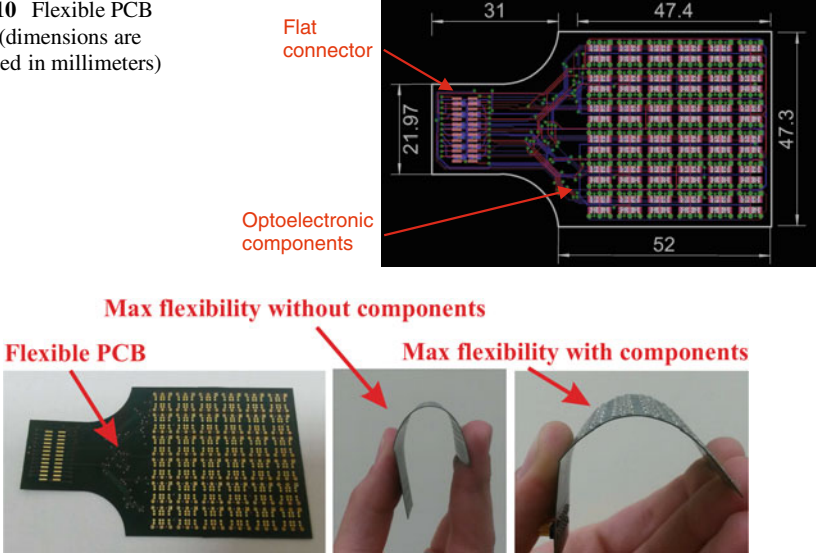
Pictures of the flexible PCB before (left and center) and after (right) soldering of optoelectronic components
